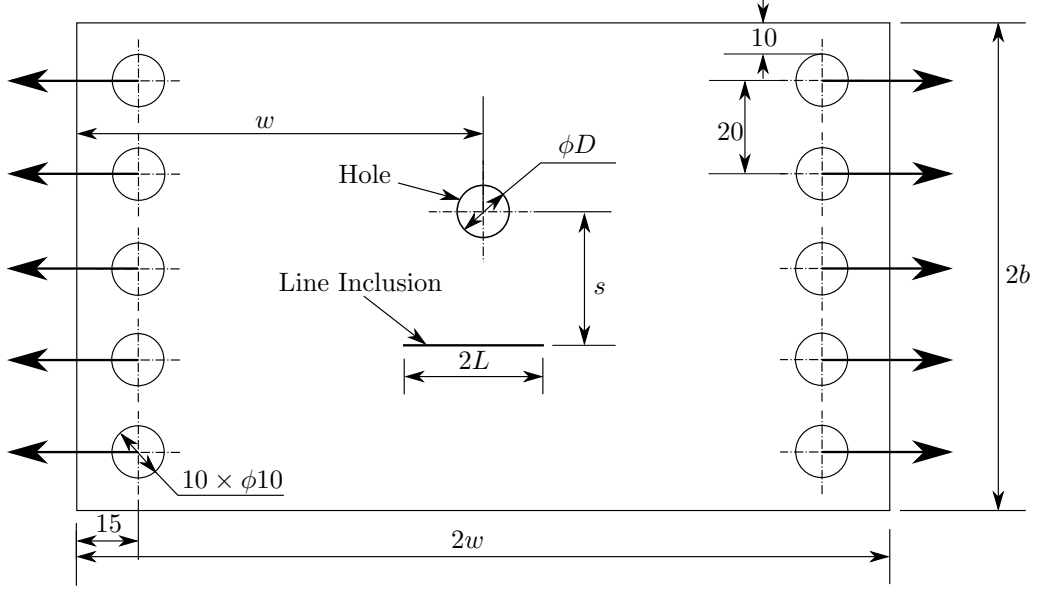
A line inclusion with a hole embedded in resin-matrix specimen drawing with dimensions used for the photoelasticity experimentation.
